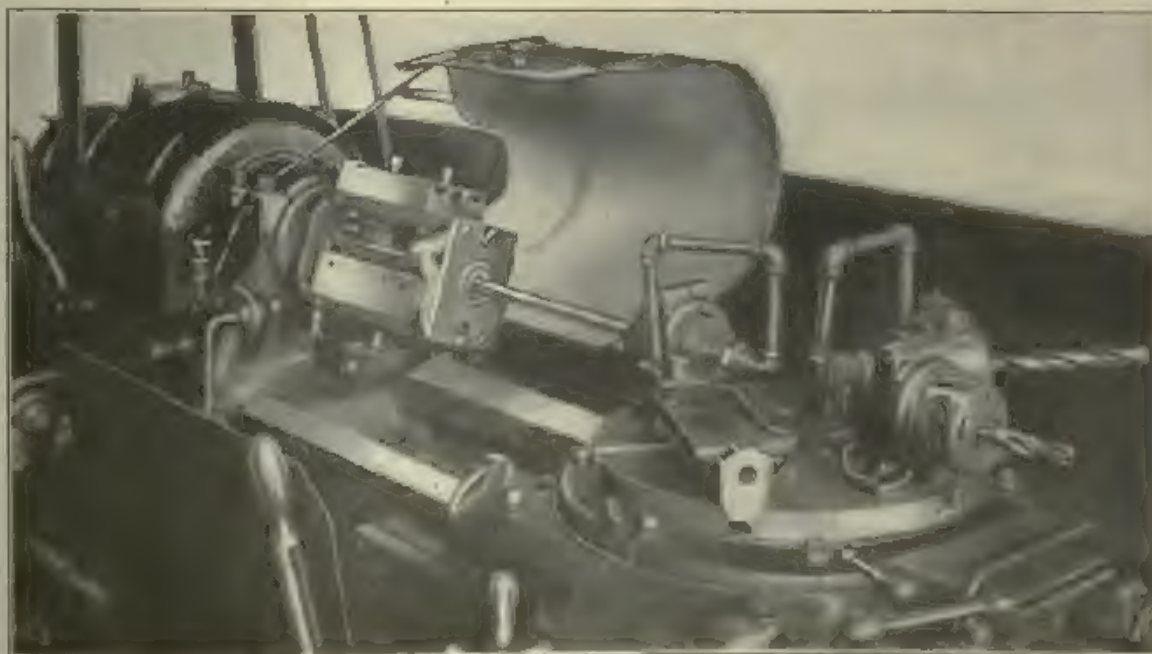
BORING AND REAMING THE MAIN HOLE THROUGH THE RECEIVER
